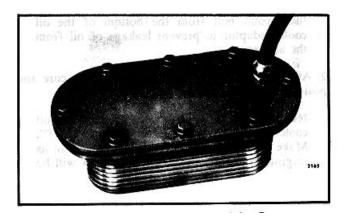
Oil Cooler Core Prepared for Pressure Check
